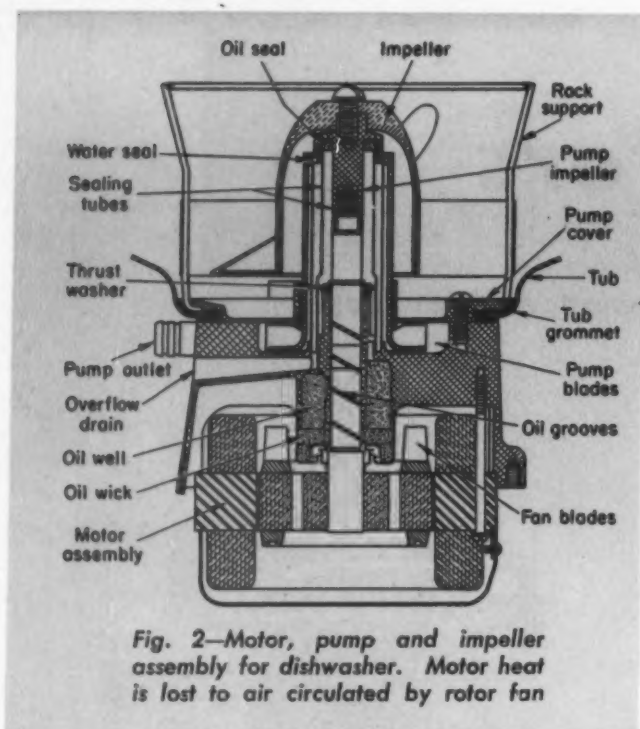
Motor, pump and impeller assembly for dishwasher. Motor heat is lost to air circulated by rotor fan
